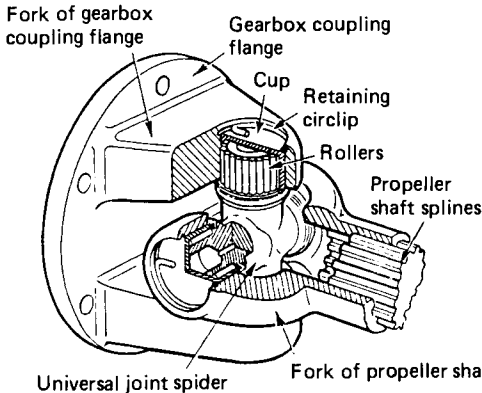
Flange-mounted Hooke's joint on a driveshaft (propeller shaft)
